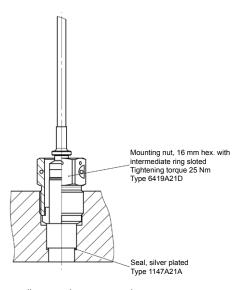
Installation with mounting adapter Type 6419A21D and seal Type 1147A21A
